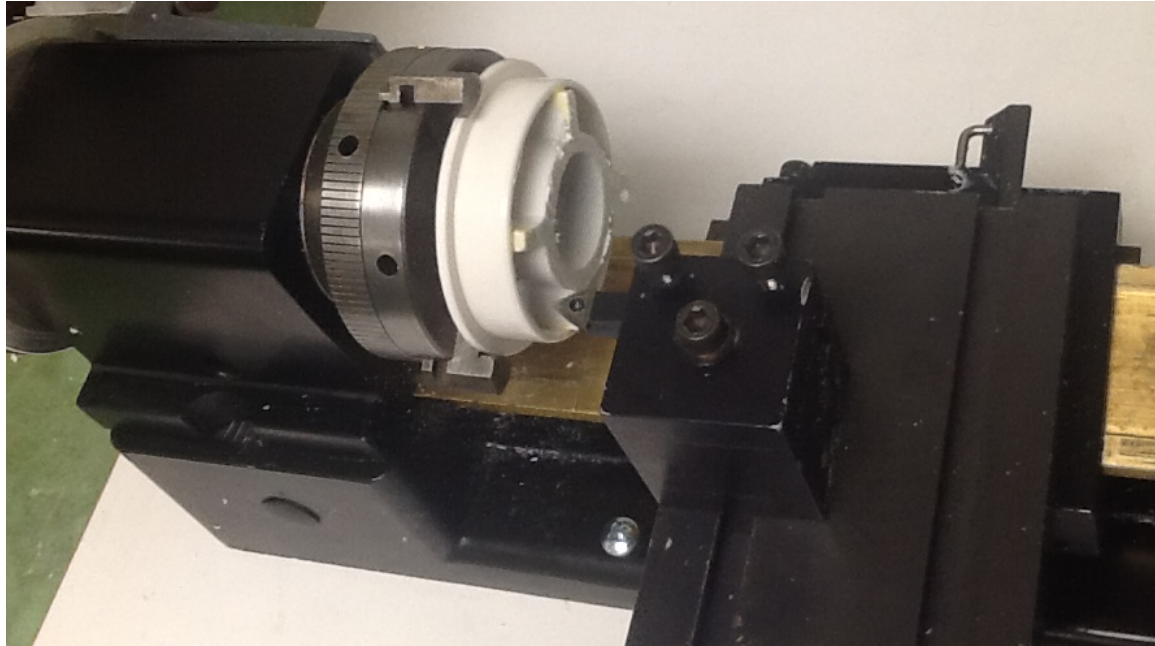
Fabrication of filter supports step 7. The bushing frame was glued into the outer ring of the knockout plug with the rough saw-cut surface protruding. A lathe was used to complete the filter support by cutting it to a constant thickness and producing a smooth surface.
